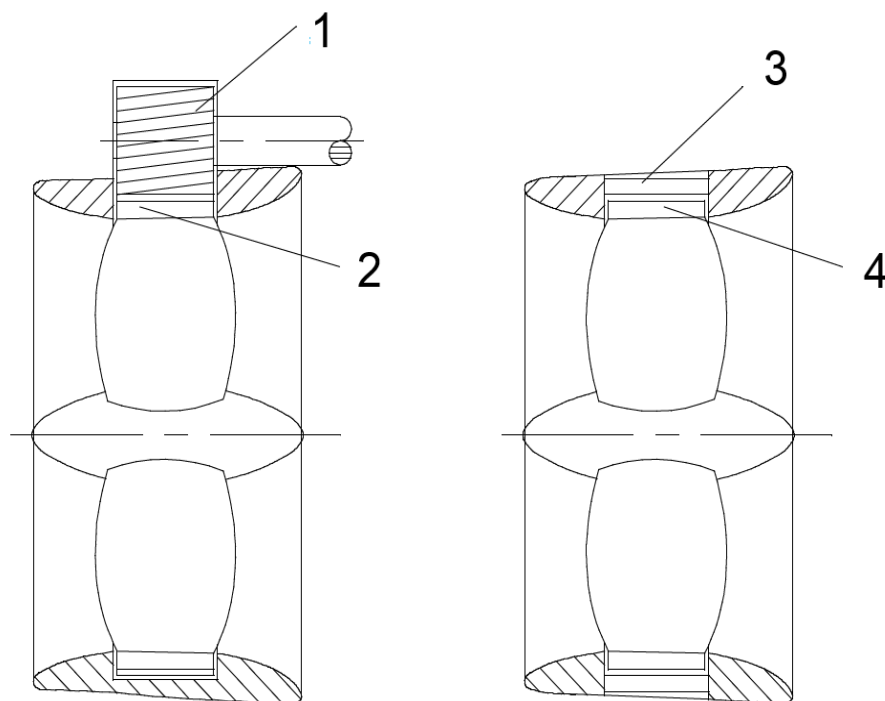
Scheme of two rim driven propellers. On the left an old RDP actuated by mechanical gears, on the right a new one actuated by an electric motor. 1) Small driving gear 2) large driven gear 3) electric stator 4) permanent magnet rotor. Image from [2]
